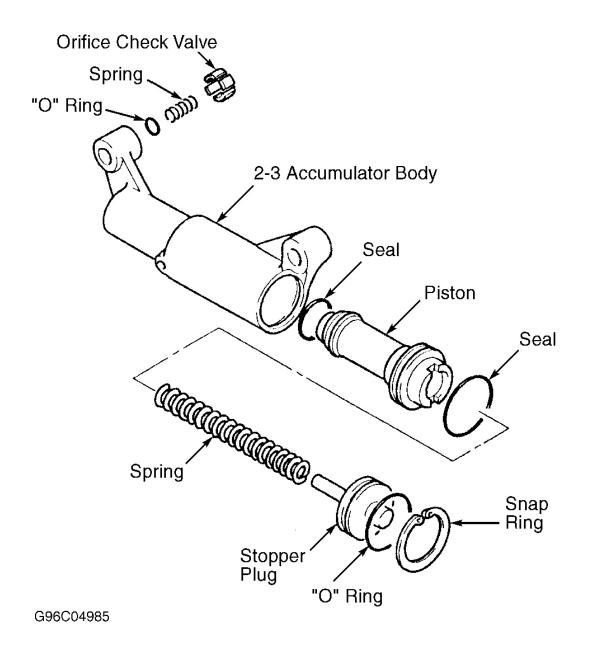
Exploded View Of GF4A-EL 2-3 Accumulator Courtesy of MAZDA MOTORS CORP.
